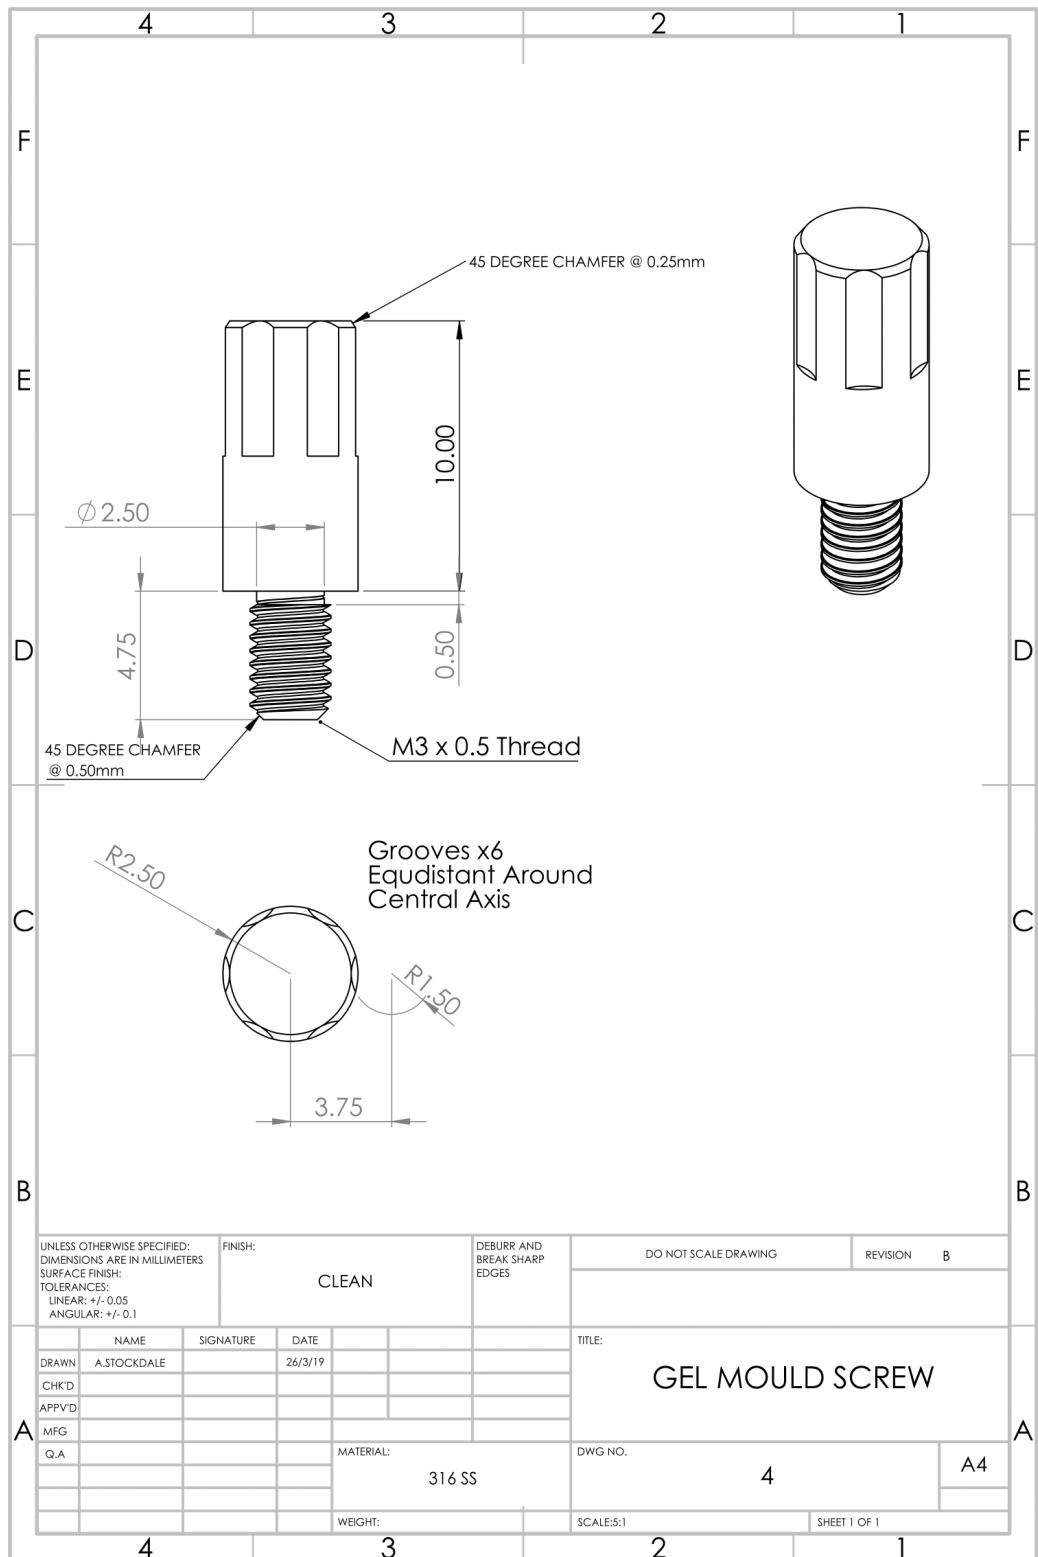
CAD drawing of the screw piece of the distraction mould.
